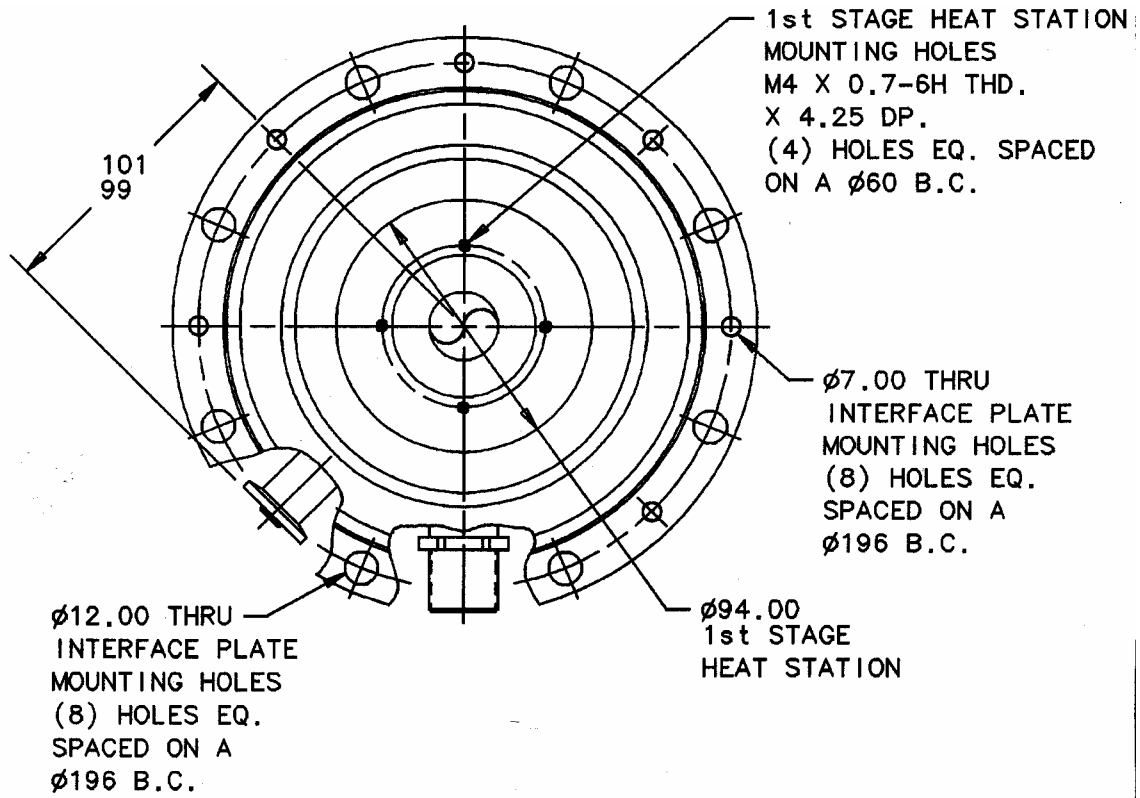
Interface Plate and First-Stage Heat Station, Mounting Holes
